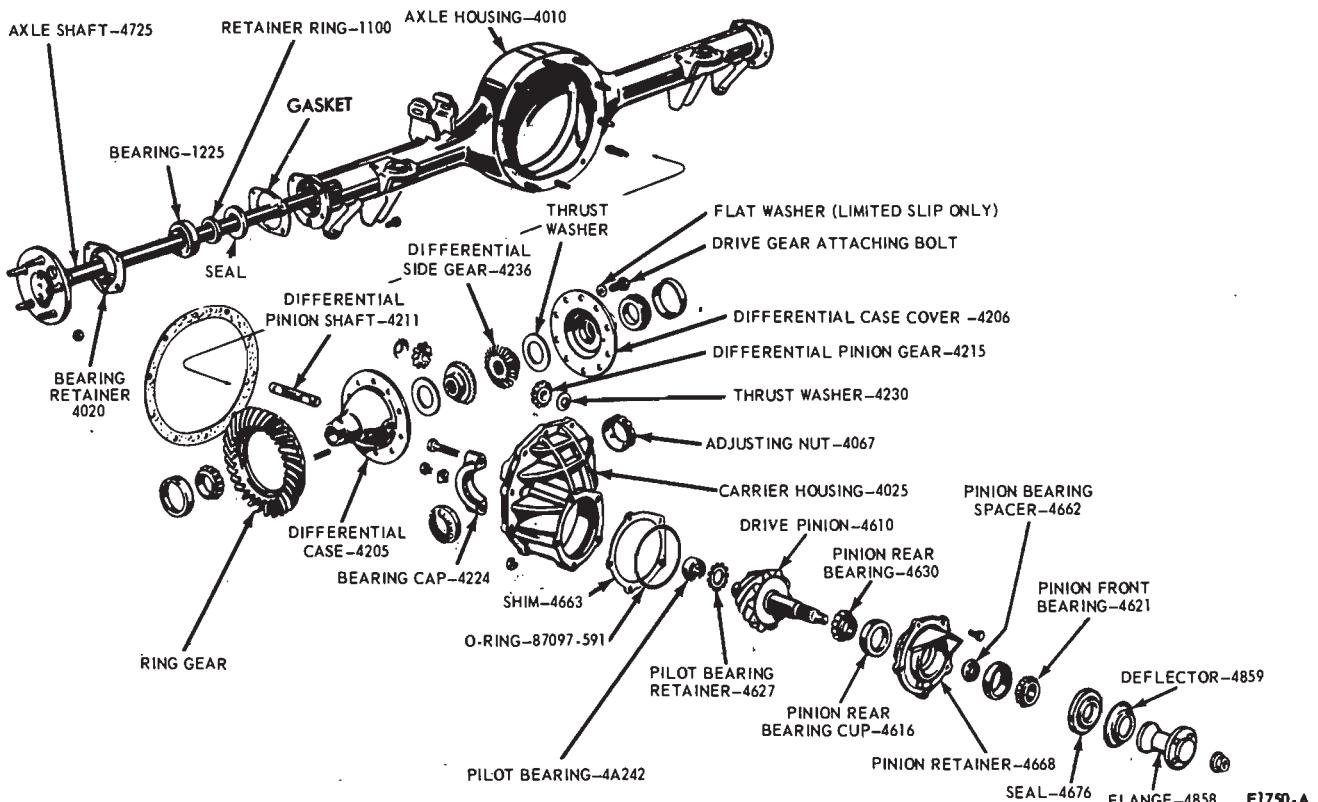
Rear Axle Disassembled—Typical Removable Carrier With Conventional Differential
